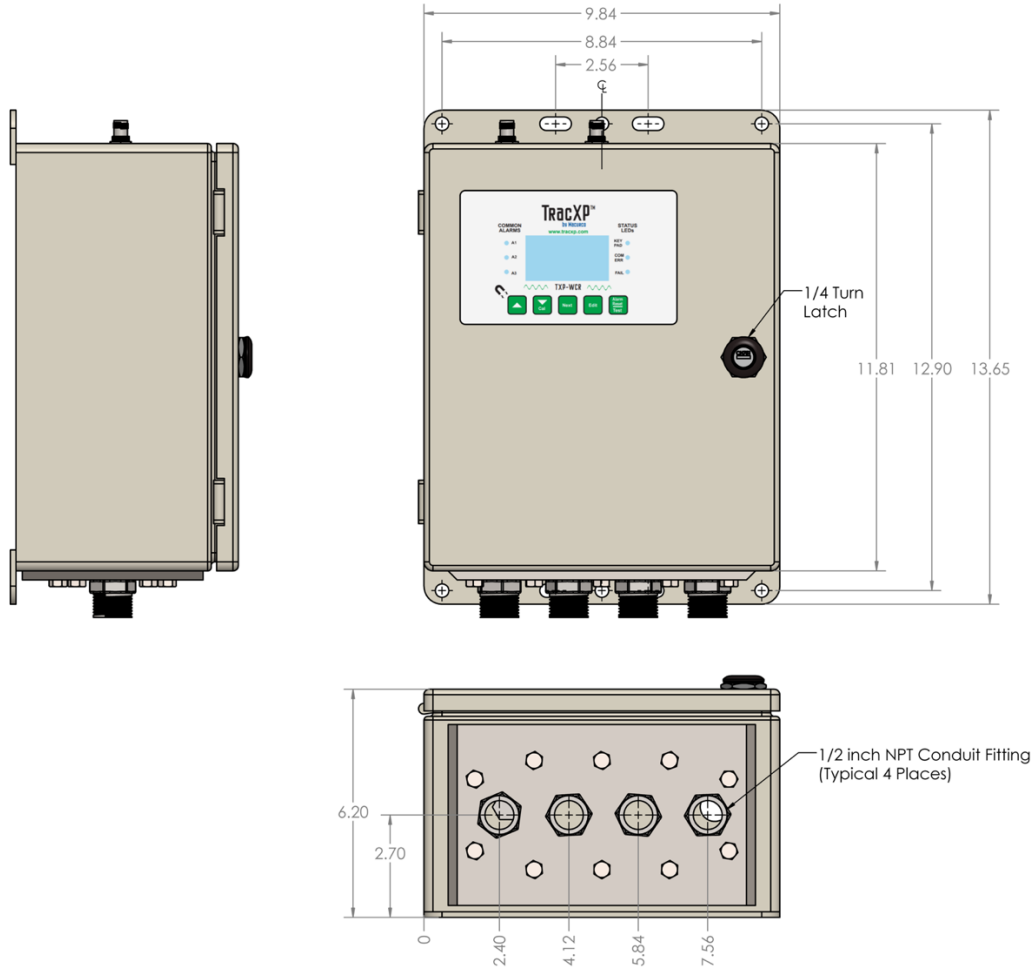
NEMA 4X Stainless Steel Wall Mount Enclosure
